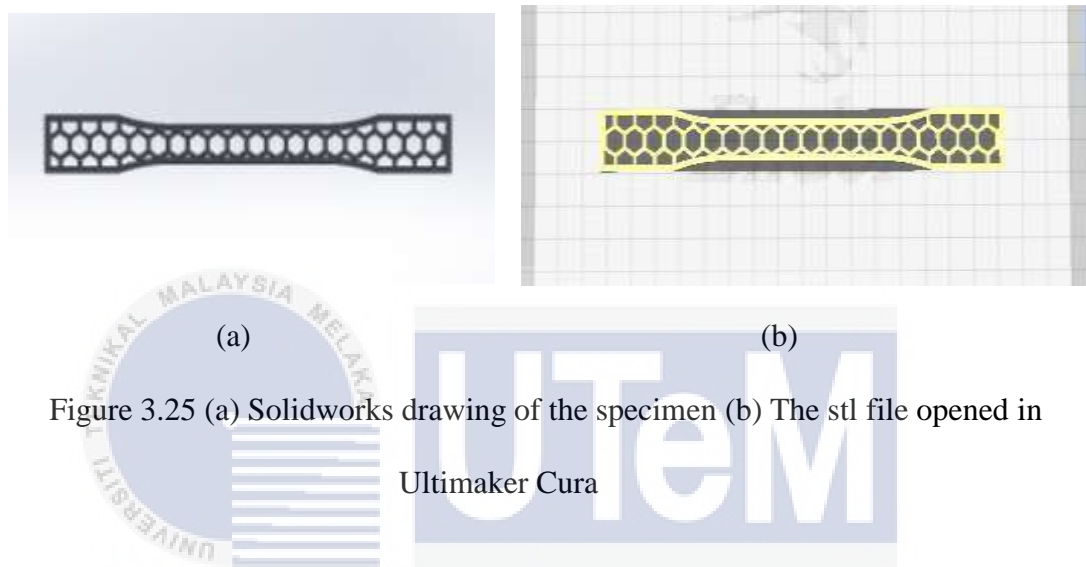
(a) Solidworks drawing of the specimen (b) The stl file opened in Ultimaker Cura
